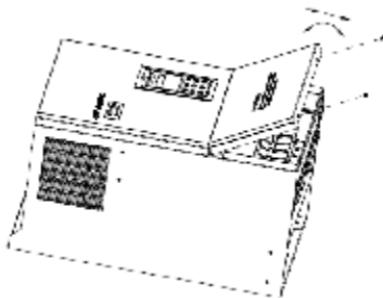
Dis-assembly and mounting sketch of metal cover
